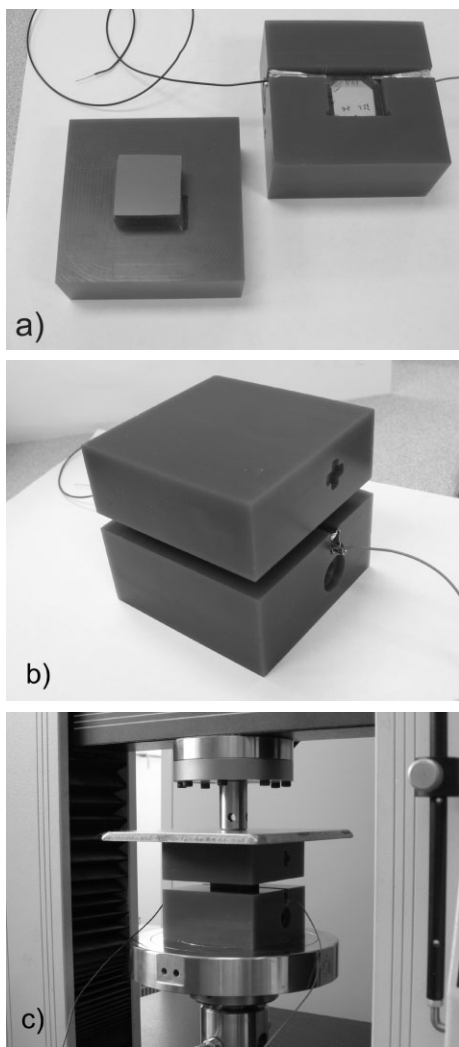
Rapid Prototype pressure test fixture; a) Open, showing electrical contacts and rubber cushioning; b) Closed, assembled; c) Installed on a mechanical testing machine.
